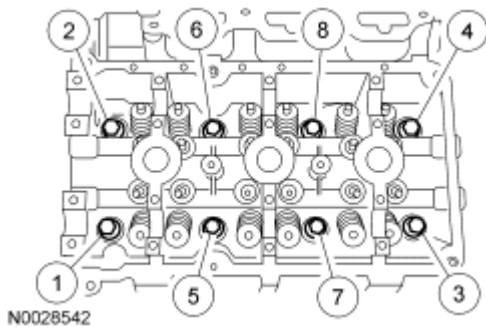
Identifying Loosening Sequence Of Cylinder Heads Bolts
